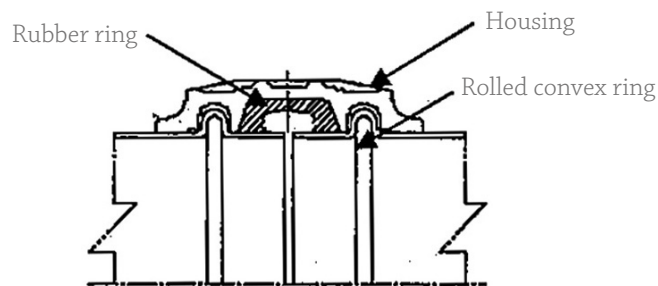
Section of pipes connected with method for joining pipes by forming-rolled convex rings (rolled ring method)³
